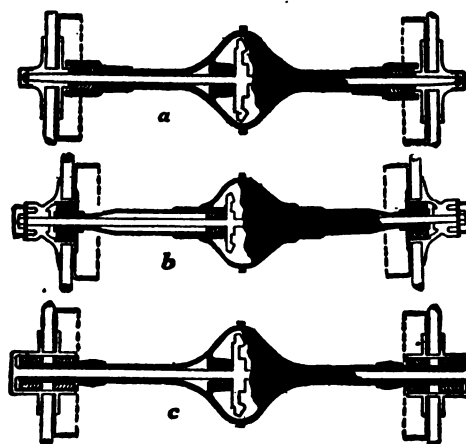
Types of rear axle: *a* Semi-floating, bearings at outer ends rest directly upon axle shafts, inside axle housing; *b*, three-quarter-floating, bearings on wheels roll on axle housing; *c* full-floating, two sets of bearings in each wheel supported on axle housing. Bearings shown by cross lines. (Oakland Motor Co.).
